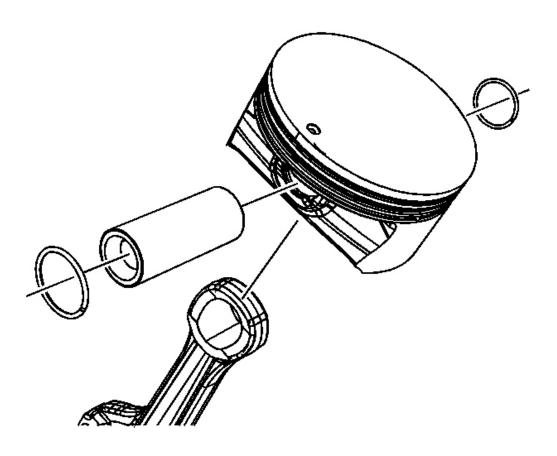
Piston Pin, Piston & Connecting Rod Courtesy of GENERAL MOTORS CORP.
